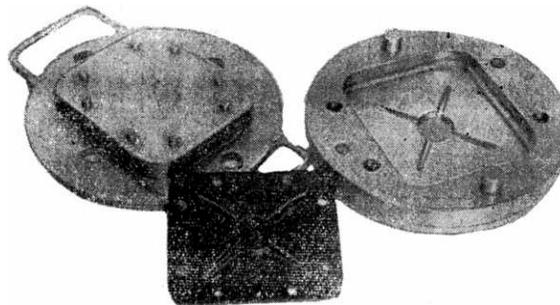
Mobile drilling rig gearbox cover and mold making machine
